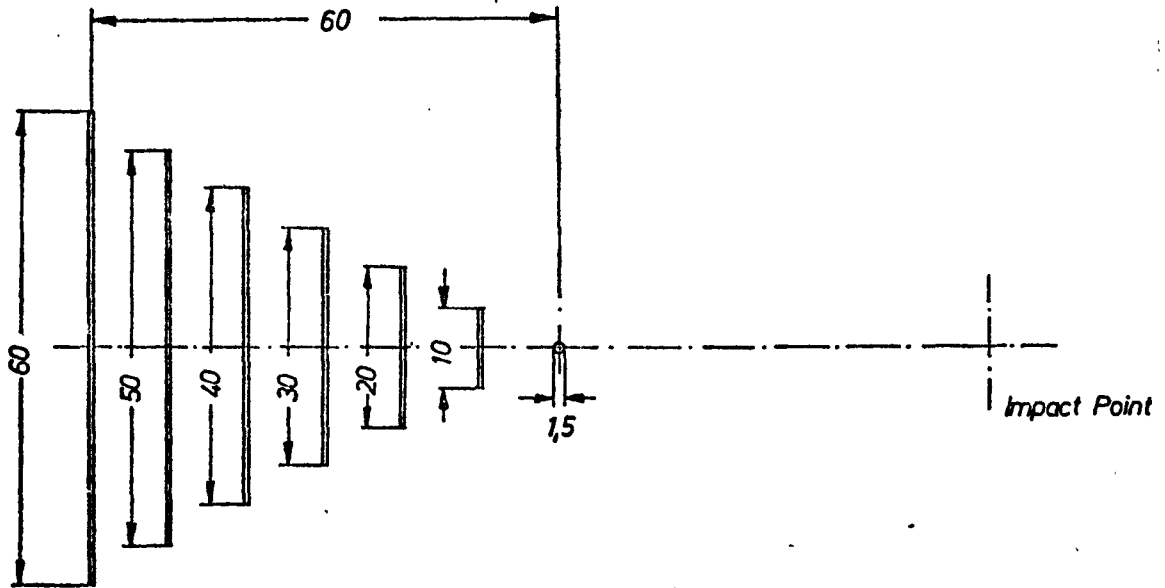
Crack arrangement with cracks between 10 and 60 mm
